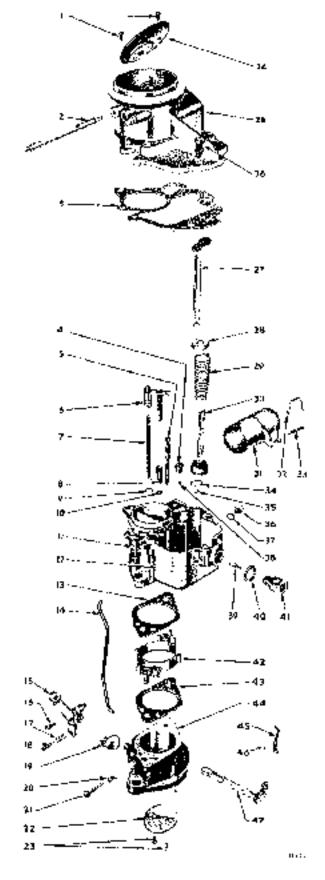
Corburetor (Disassembled View) (1942 Model, Typical of 1936-41 Models)
